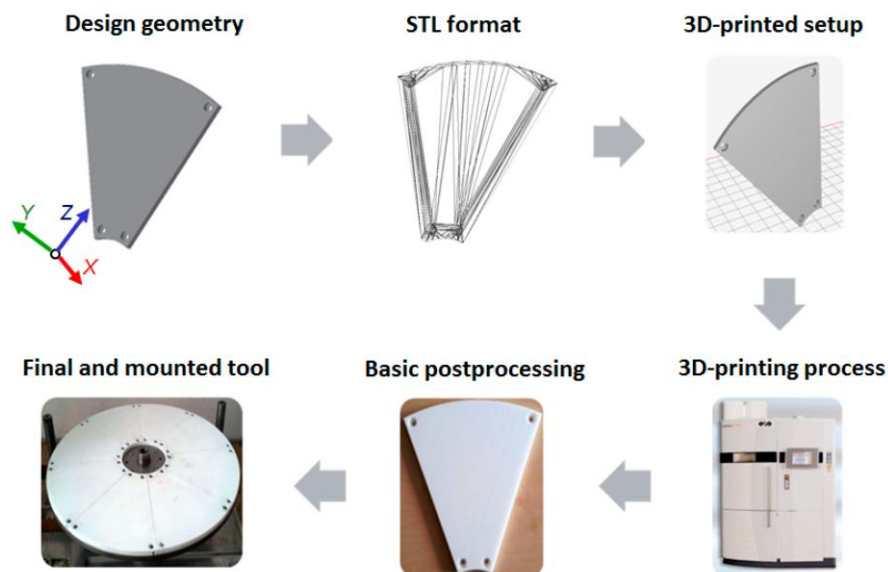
Fabrication of polyamide-based lapping tool using selective laser sintering 3D printing process [42]
